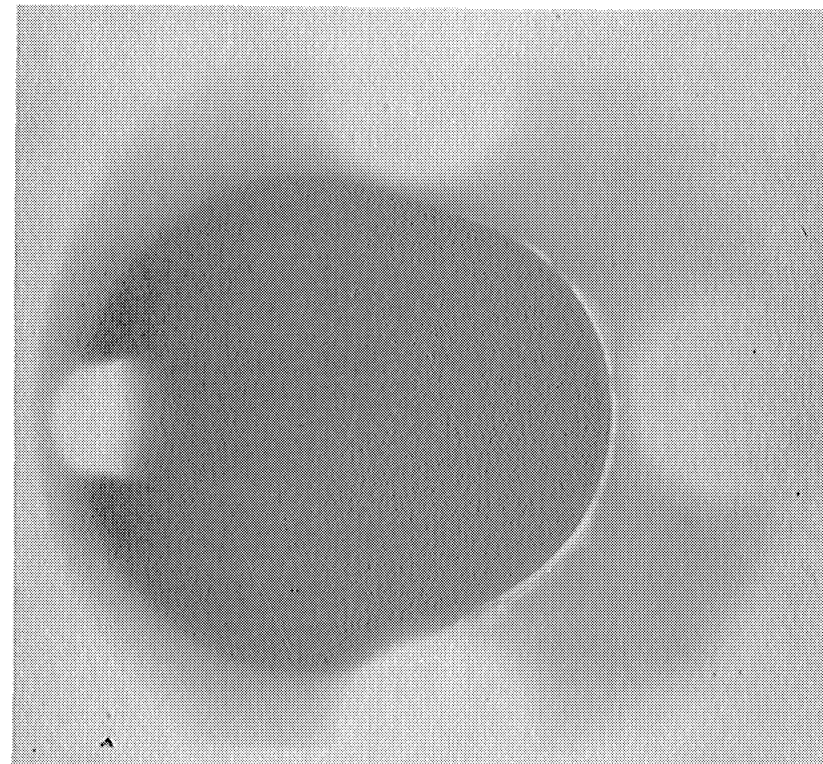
X-ray C-3: Weld at Head -
